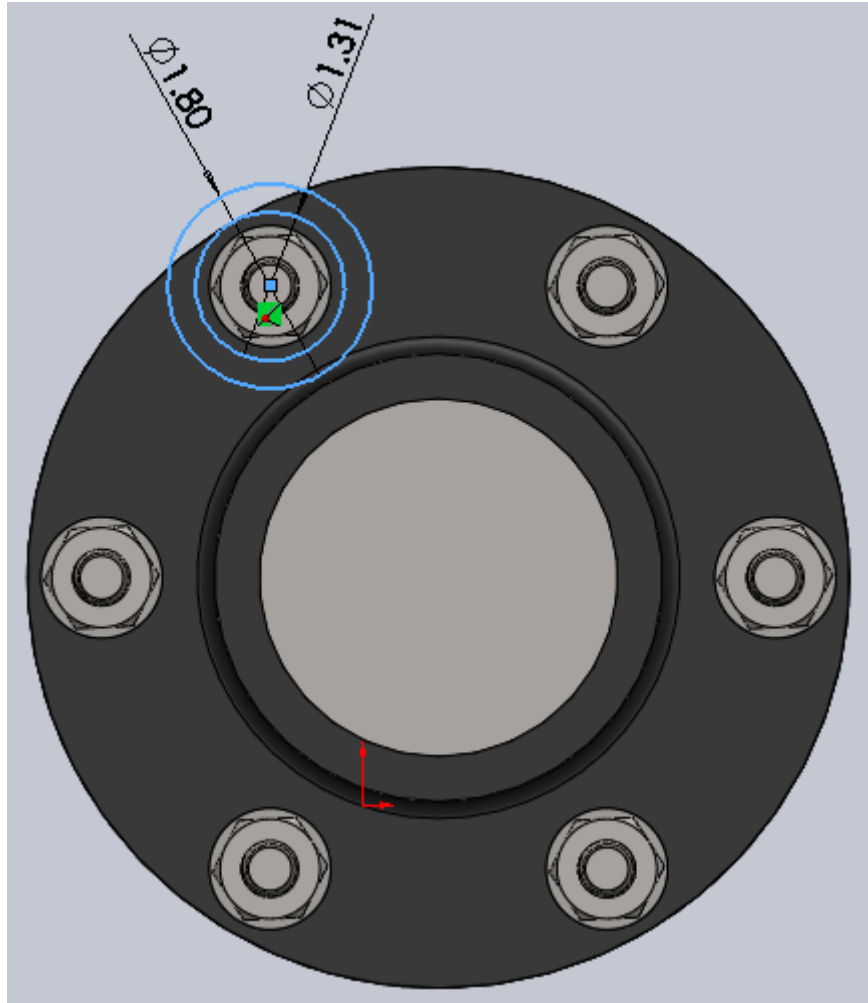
Showing the dimensions of a socket/wrench compared to the assembly geometry
